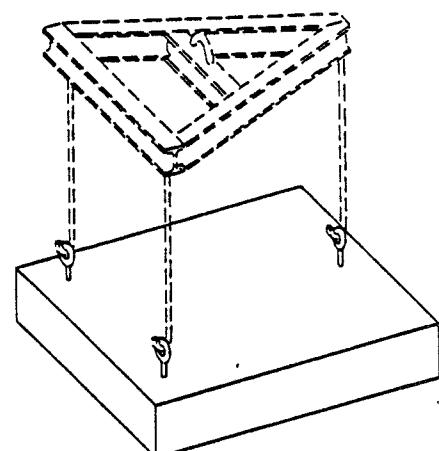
Three Eyebolts and Lifting Fixture.
